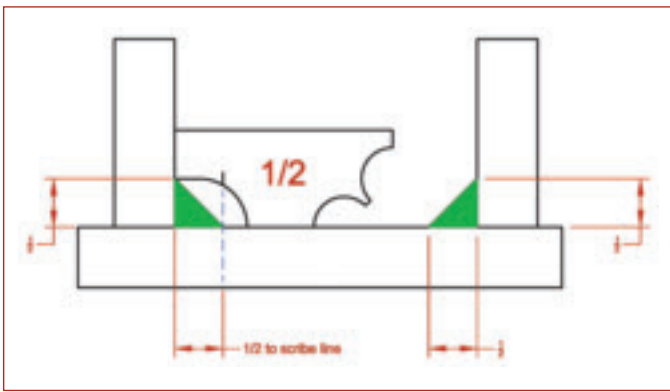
A 1/2-in. gauge is used to verify the leg size of a 1/2-in. fillet weld.
